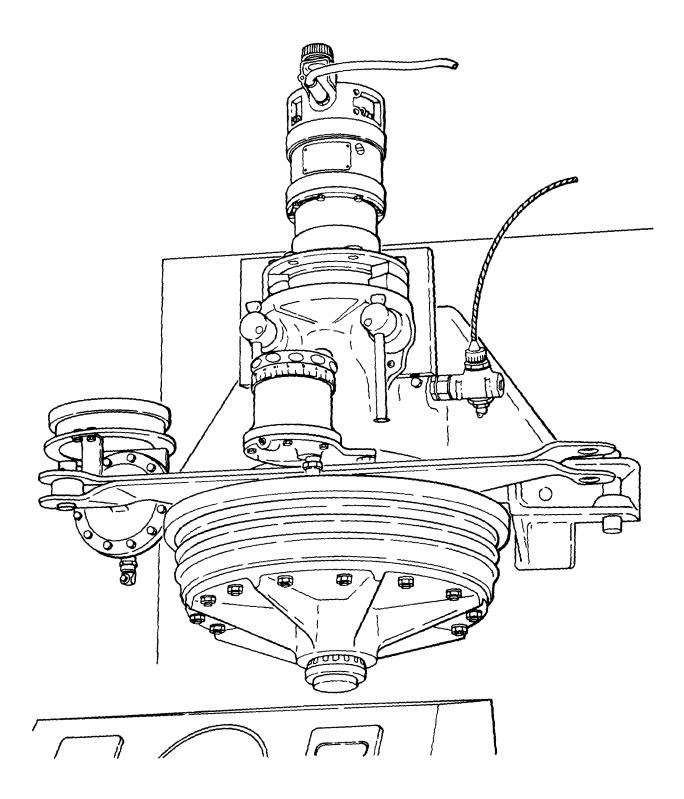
Starter Torque Tester (Starter Mounted for Testing)
